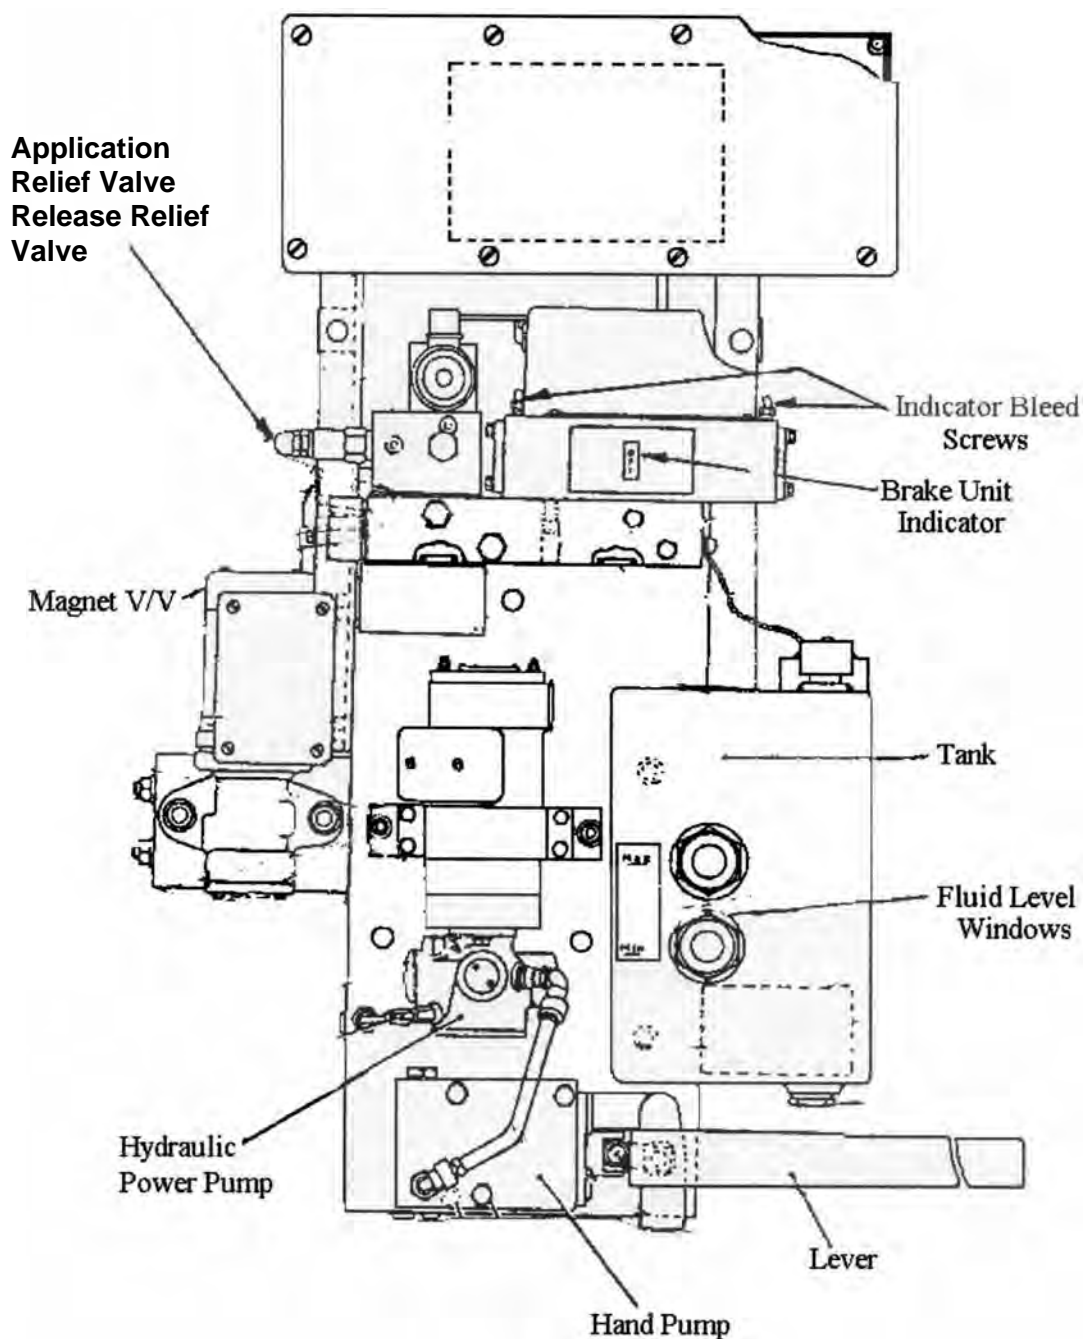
Arrangement of Hydraulic Parking Brake Control Unit
